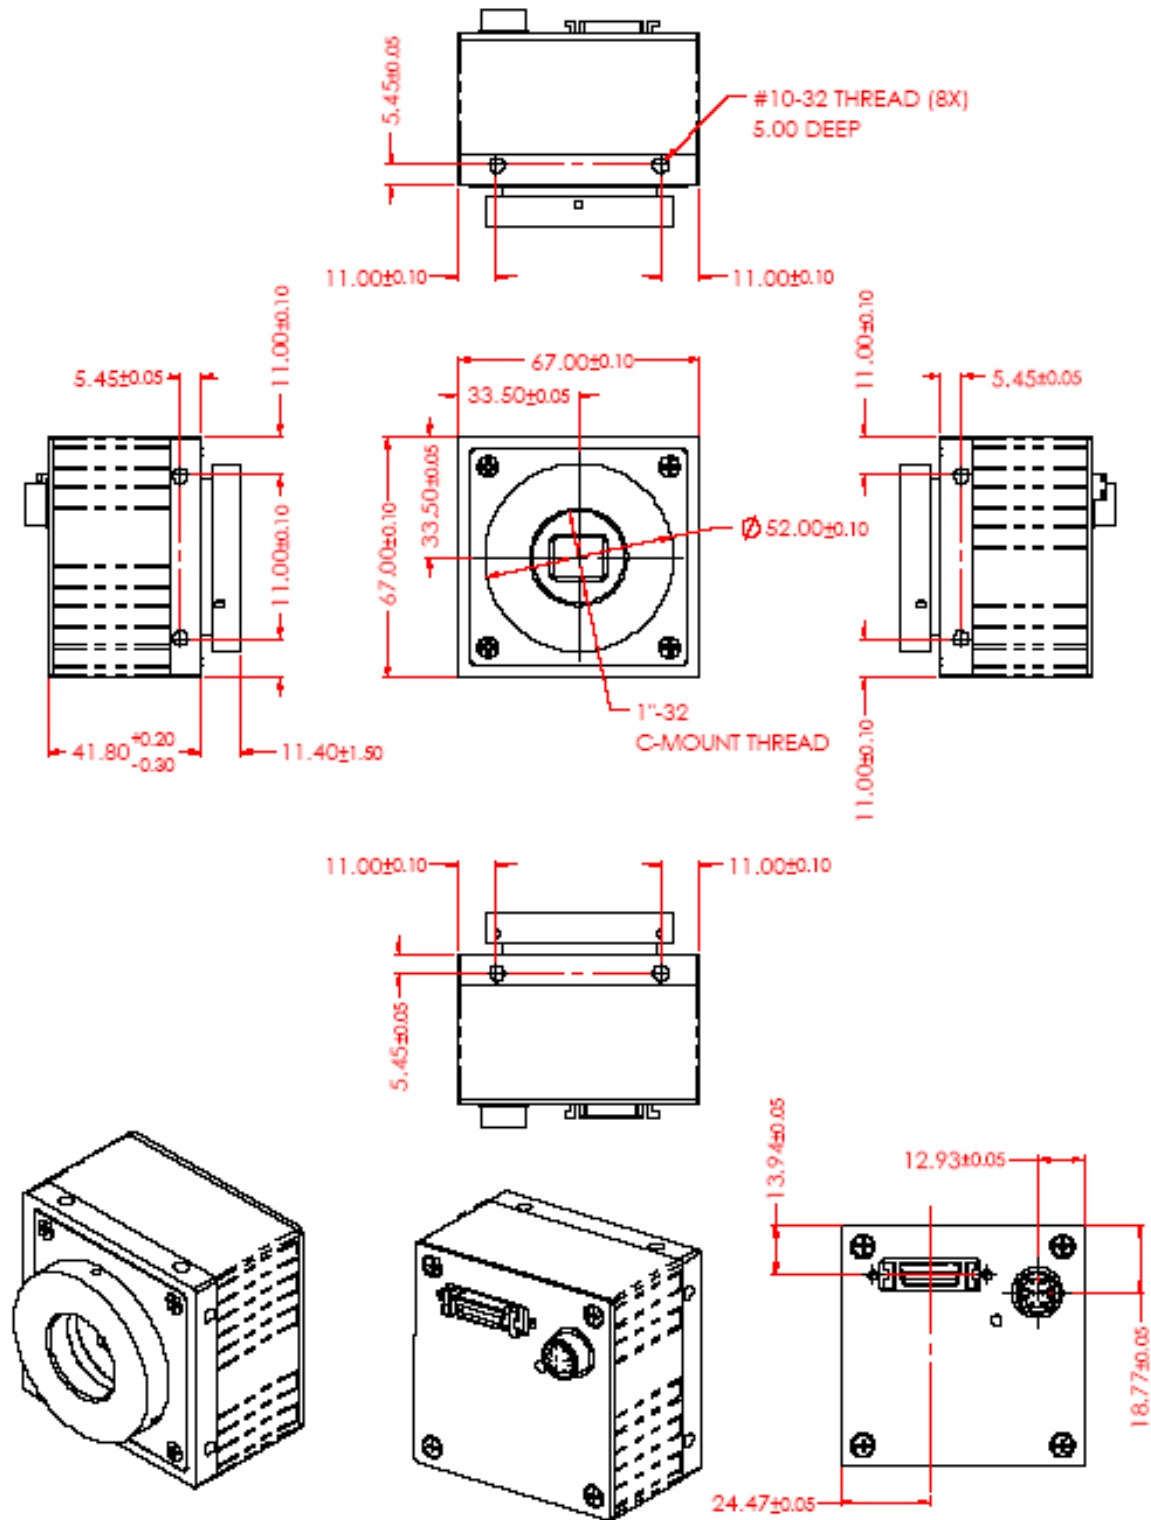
IPX-VGA120-L and IPX-VGA210-L Dimensional Drawings.
